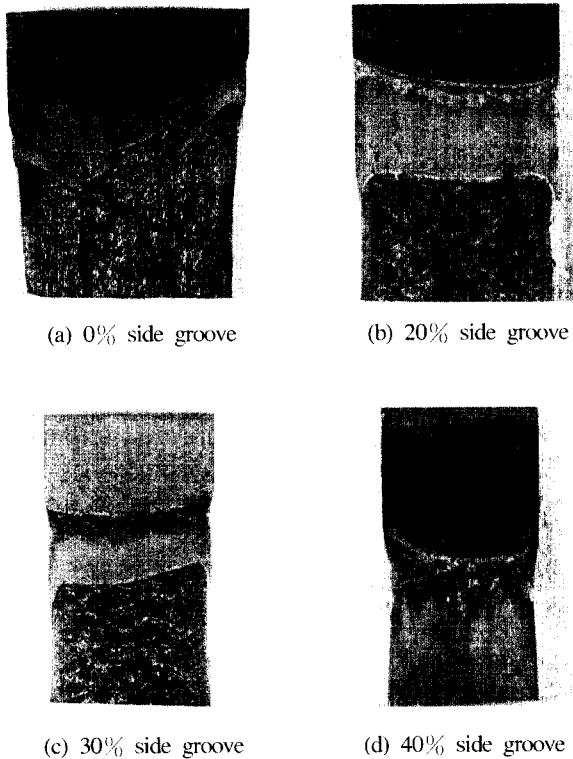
Photomicrograph of fracture surface and various side groove depth
